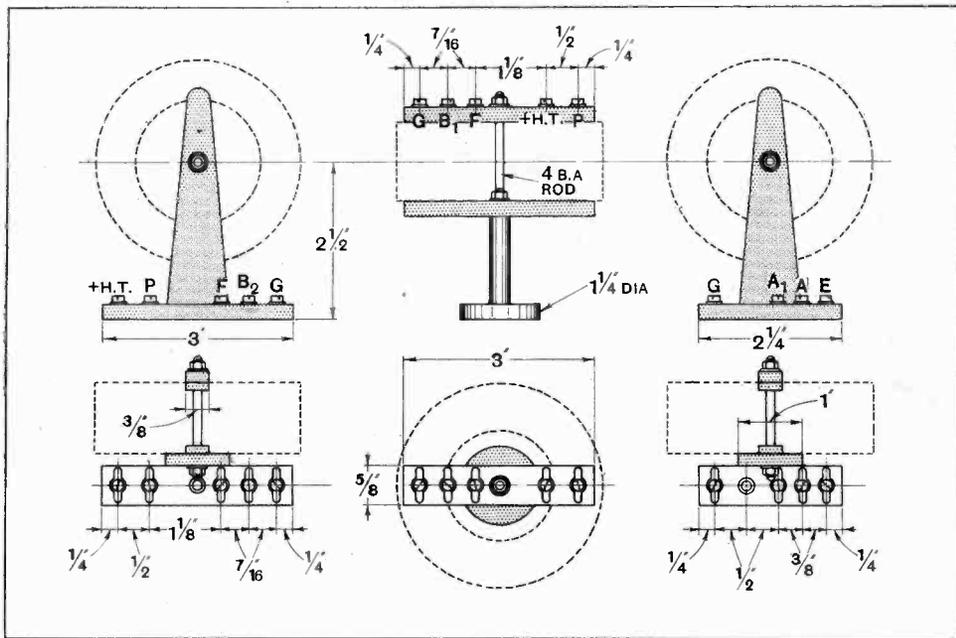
Details of the aerial coil (right); and the two H.F. transformers. The transformers consist of a Lewcos No. 300 plug-in type coil with primary and balancing windings. Connection strips are bolted in position and to the supports.
